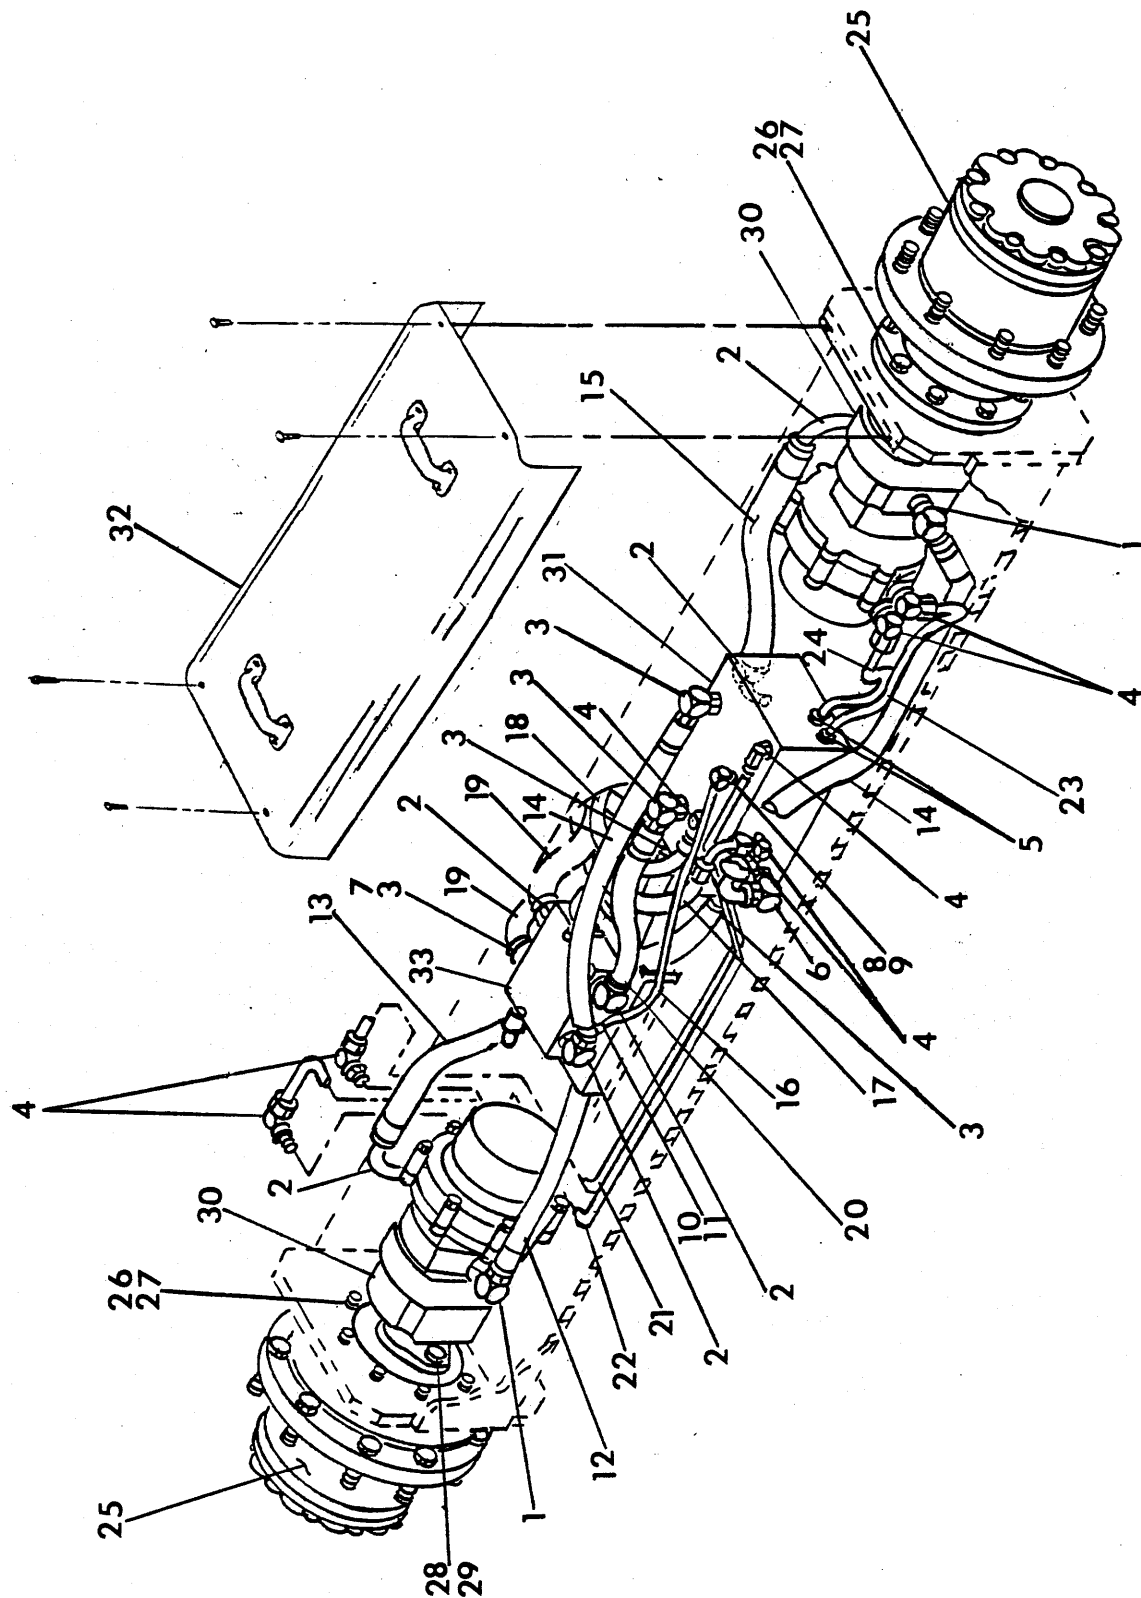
TORQUE DRIVE ASSEMBLY (ALL MODELS)
